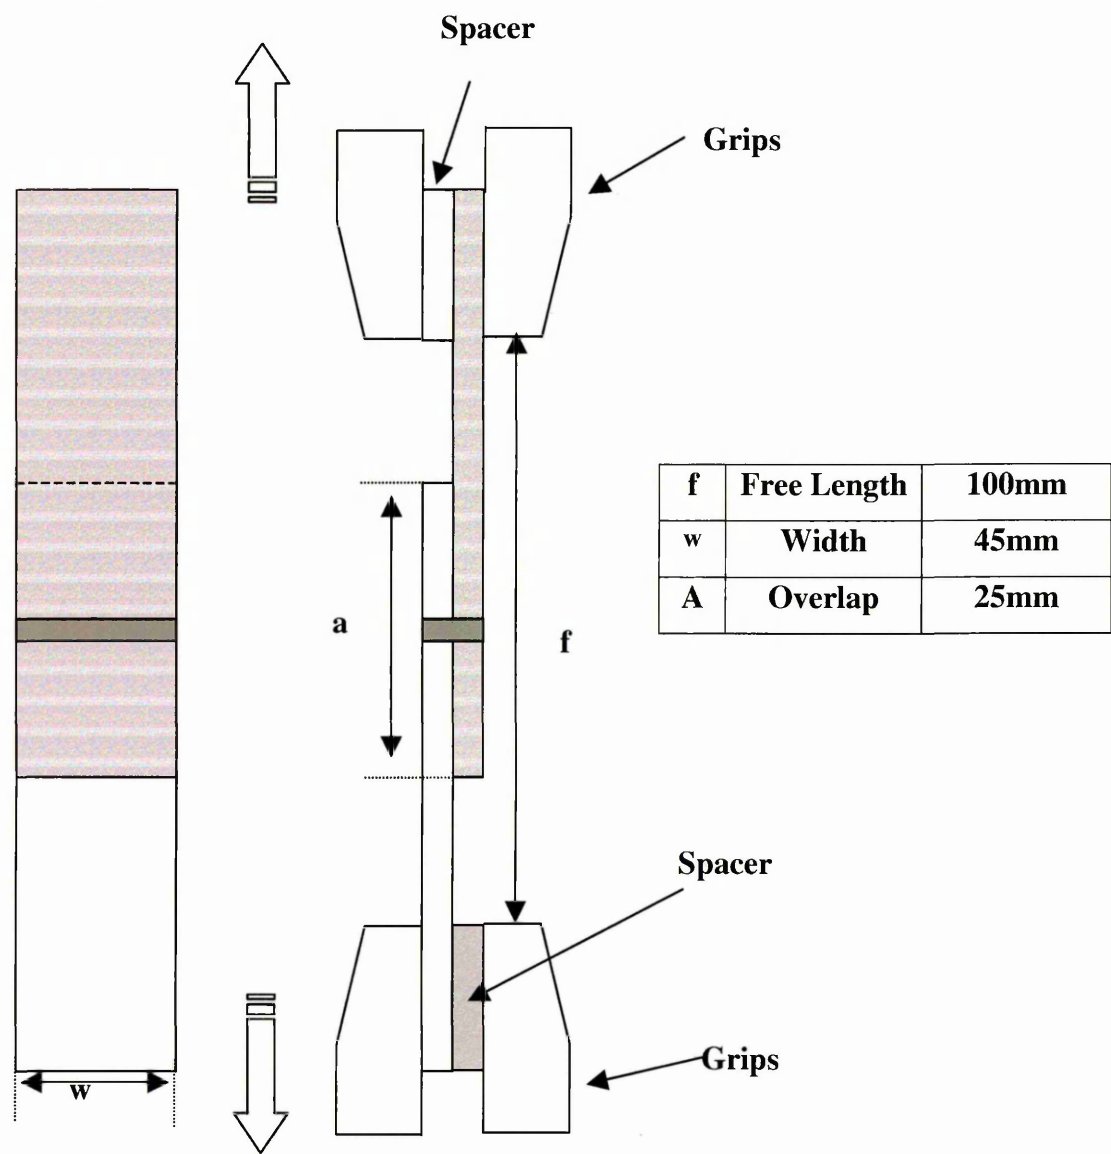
Schematic diagram showing the lap joint fatigue test dimensions
